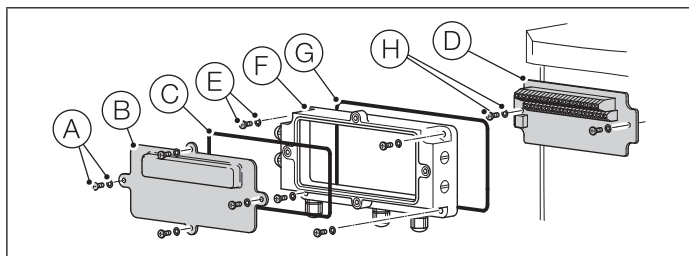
Replacing the PCB housing seals, PCB cover and PCB
